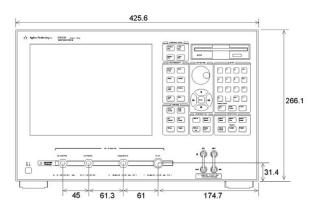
Dimensions (front view, in millimeters, nominal)
